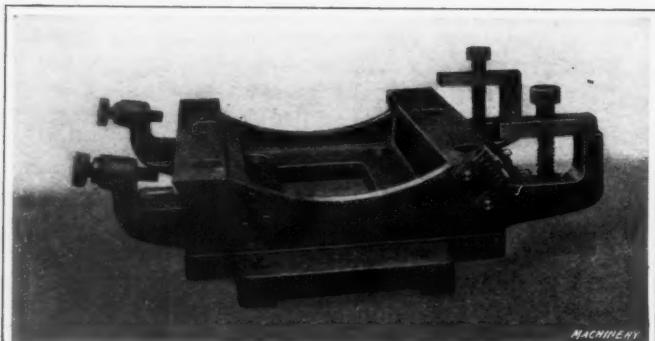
Fixture used on Heald Planetary Grinder for grinding Cylinder Bearing in Carriage
